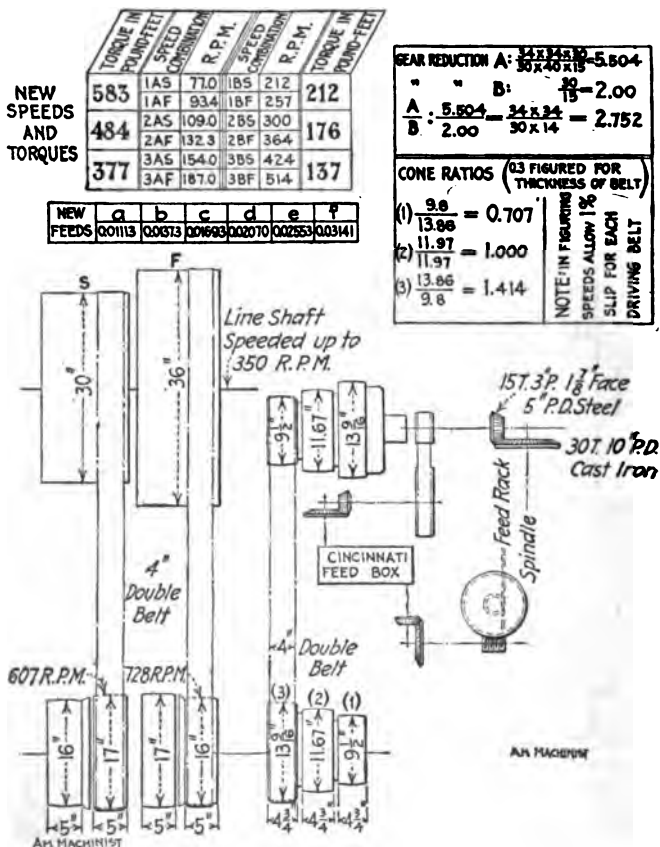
Modified speeds and torques on the drilling machine shown in FIG. 62.
